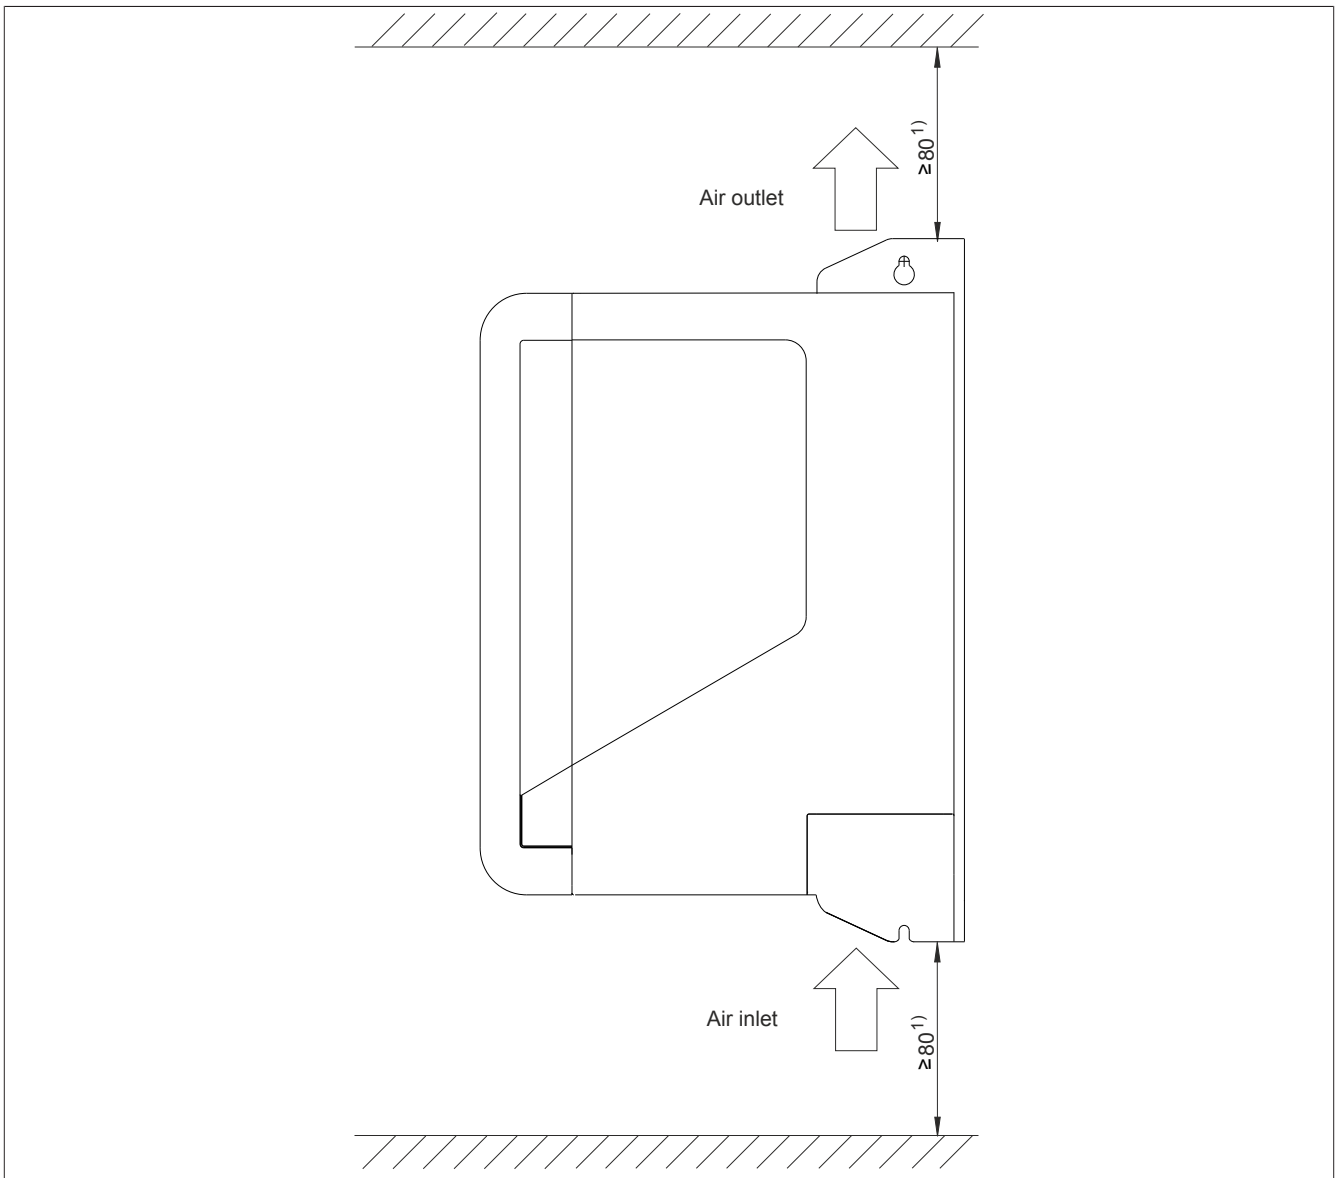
ACOPOS P3 8EI servo drives - Installation dimensions
